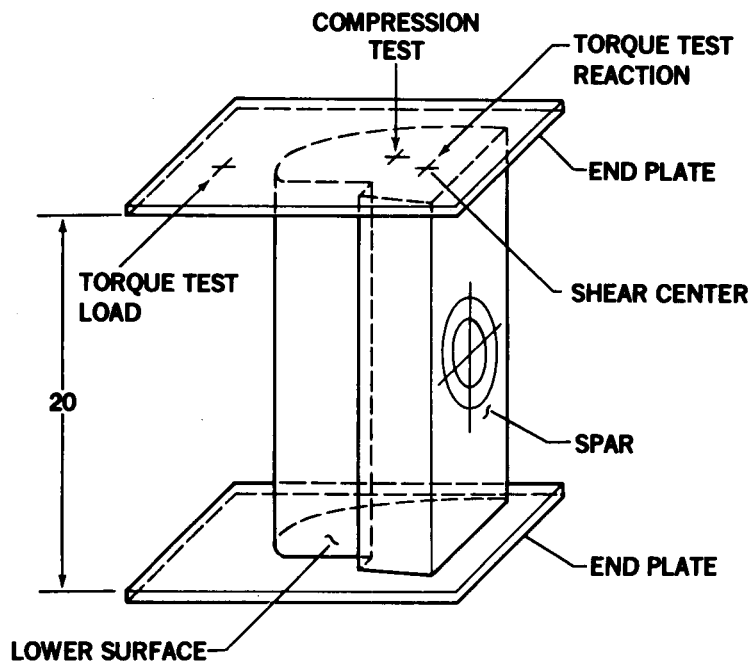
AXIAL COMPRESSION/TORSIONAL SHEAR TEST SPECIMEN
